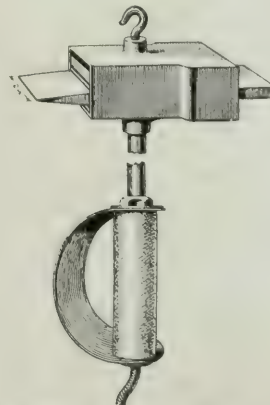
THE WHEATCROFT SOLDERING IRON.
